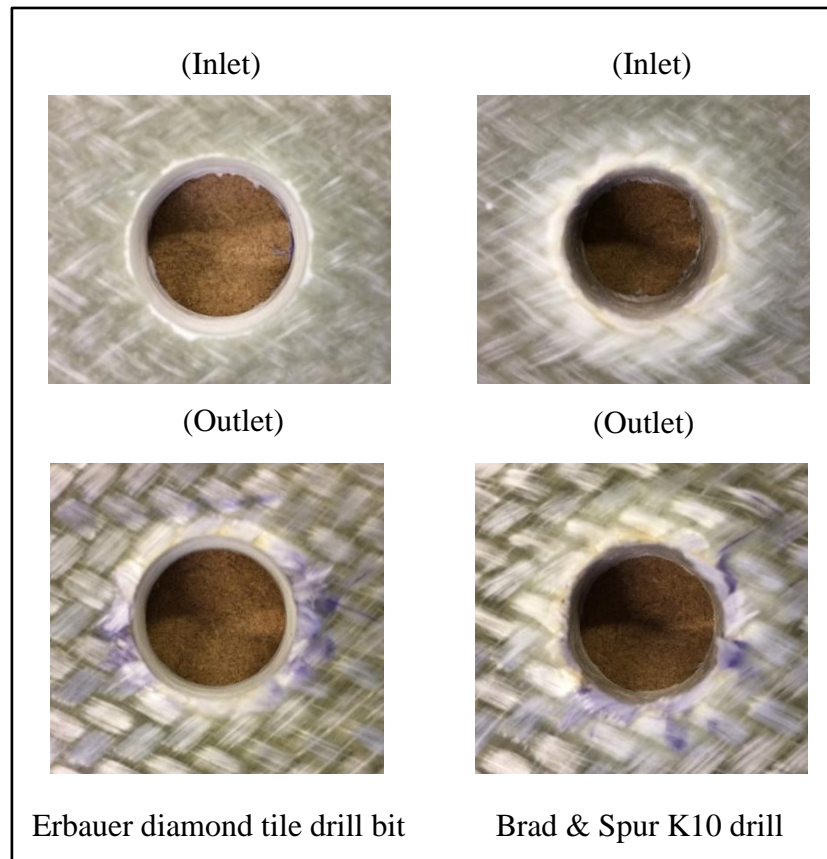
22 mm drilled holes of used tools in the experimental work
